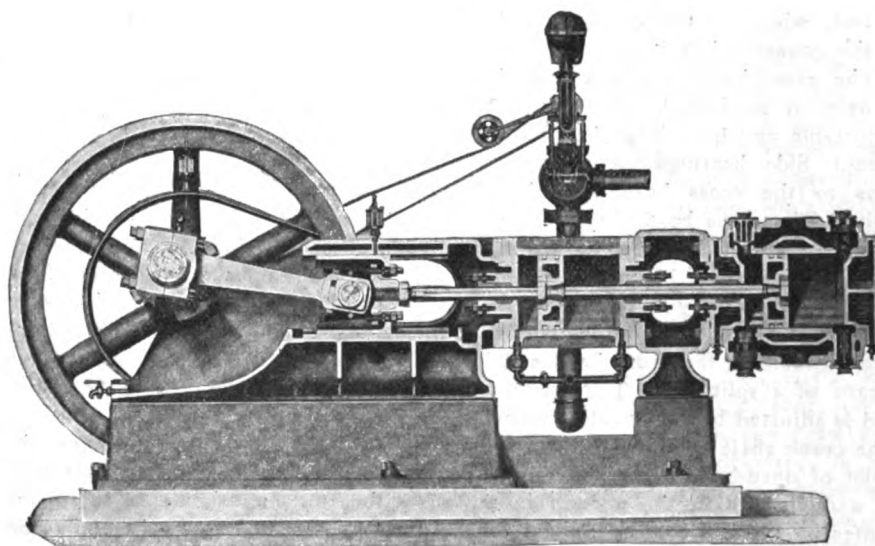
SECTIONAL ELEVATION OF SINGLE STEAM COMPRESSOR.
